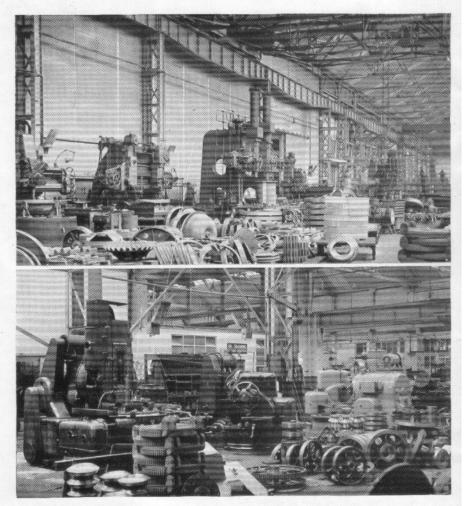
Group of gear cutting machines for small and medium size gears in the Heavy Machine Shop.
